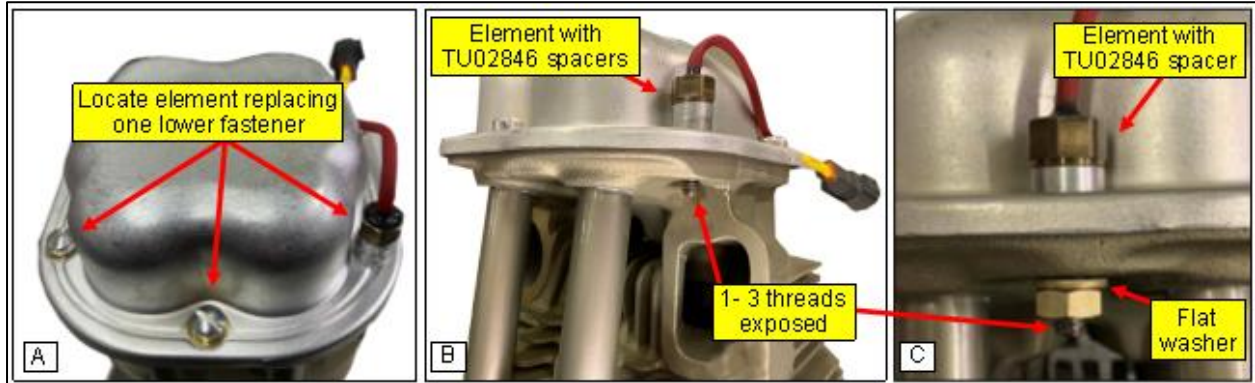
Continental and Franklin small bore straight valve cylinder head: A65/O-170, C90/O-200, C-145/O-300, E162/185/225, Franklin O-200 and 6A-215/335/350.
